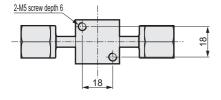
R-4RJ-K Female fitting (with bearing)
